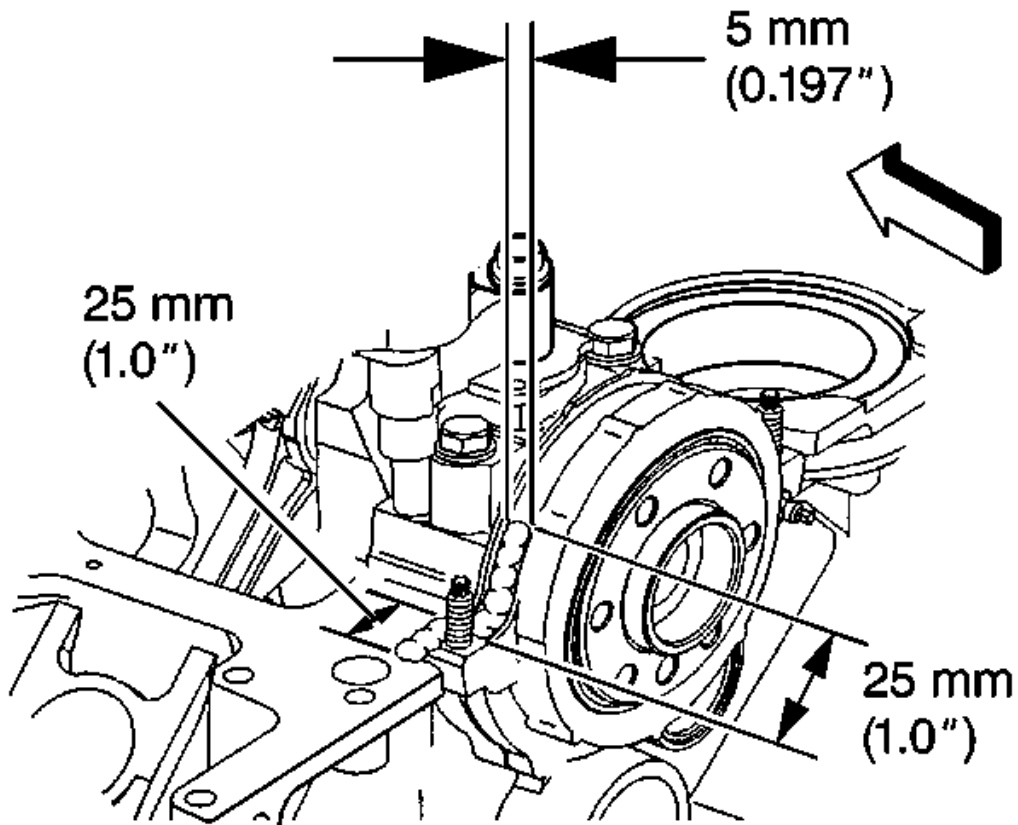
Adhesive At Right & Left Sides Of Crankshaft Rear Oil Seal Housing
